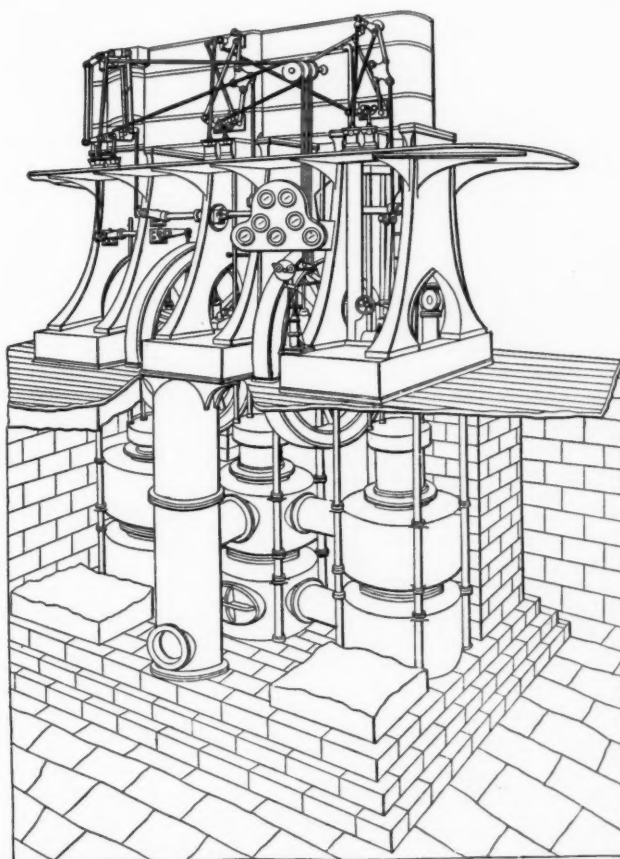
FIRST TRIPLE-EXPANSION PUMPING ENGINE
